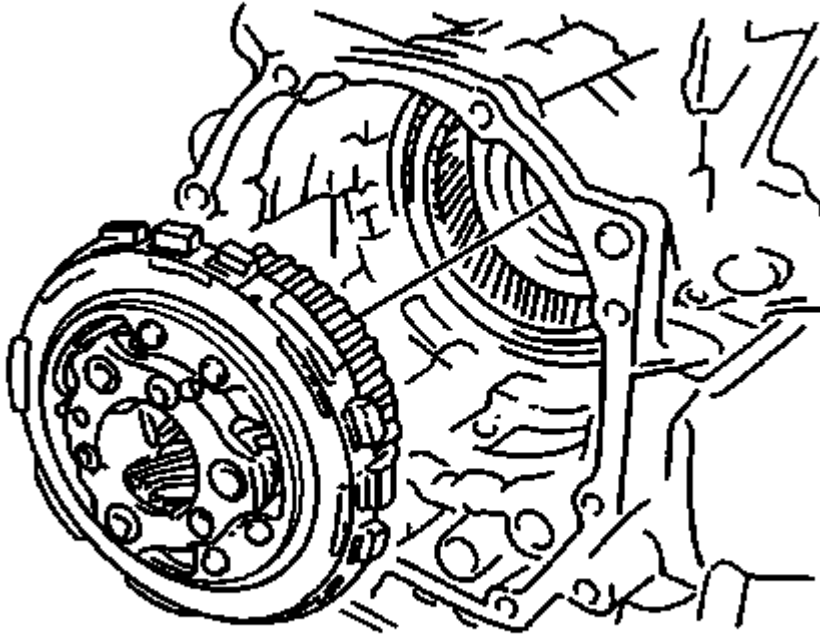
No. 2 One Way Clutch & Planetary Gear
